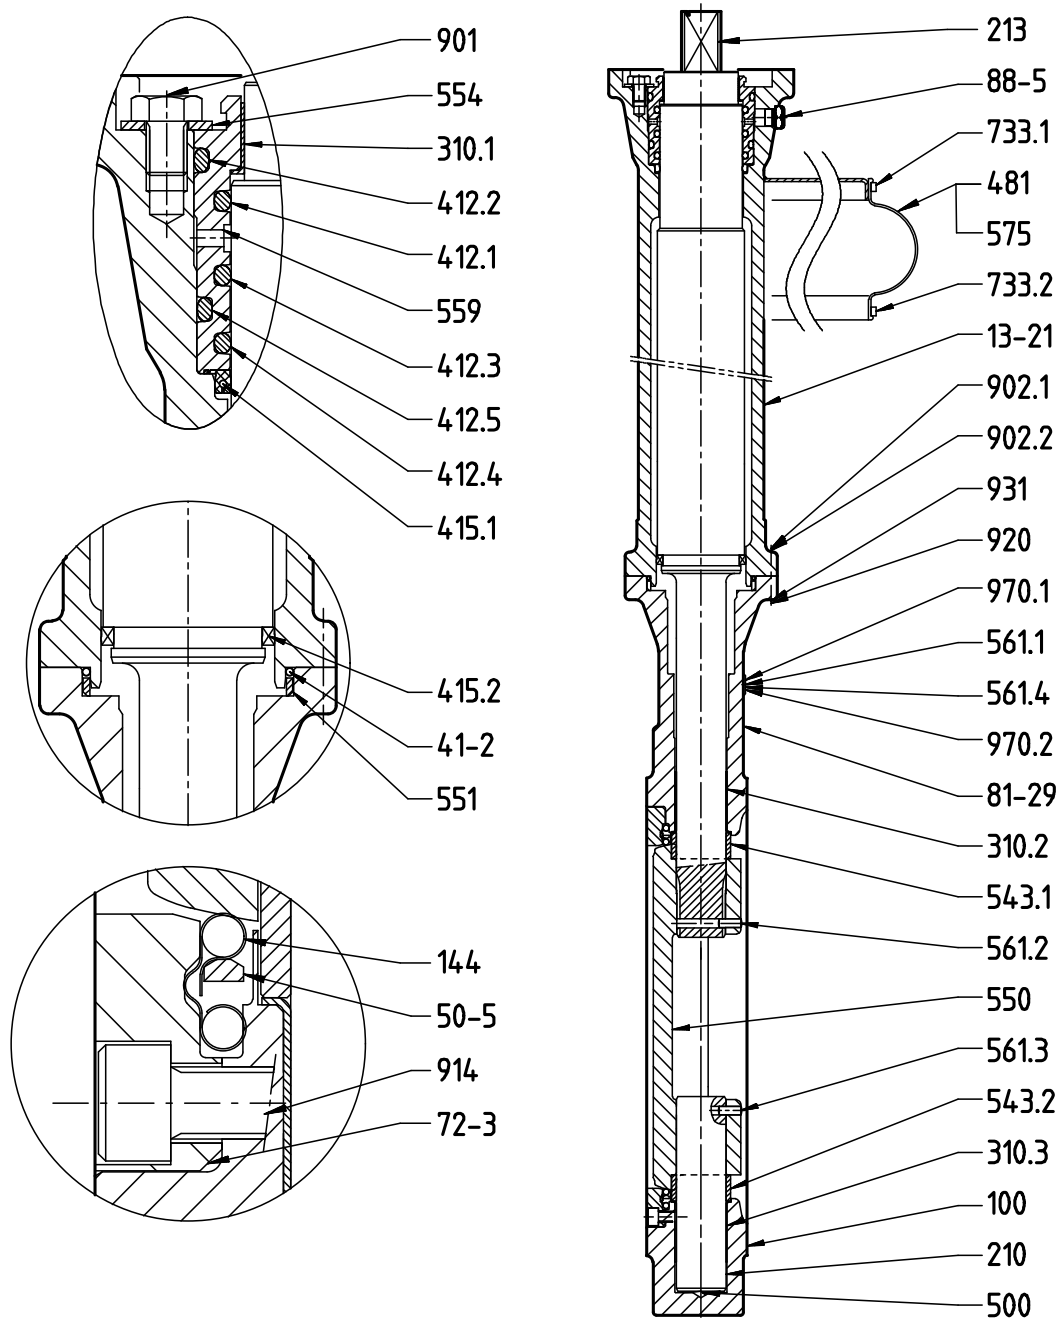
Sectional drawing of DANAIS CRYO AIR with metal seat DN 300-350 (12 - 14 inches)
